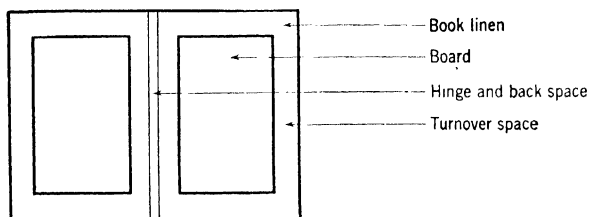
Case Cover: The Boards Pasted in Place on the Linen
